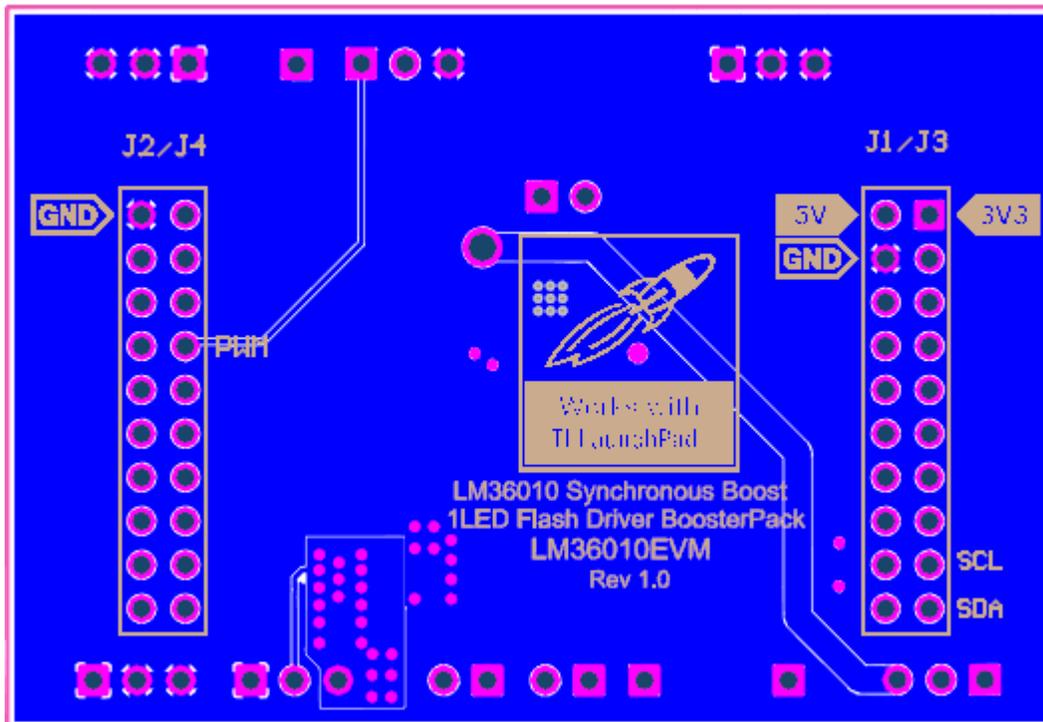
Bottom Assembly Layer (UNMIRRORED)
